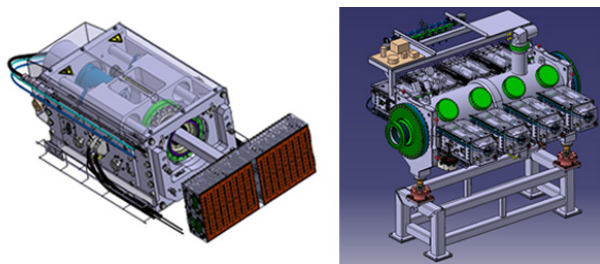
3D model of the assembly of one electrode module mounted to the linear drive (left) and the horizontal pick-up tank with four drives at each side (right).
